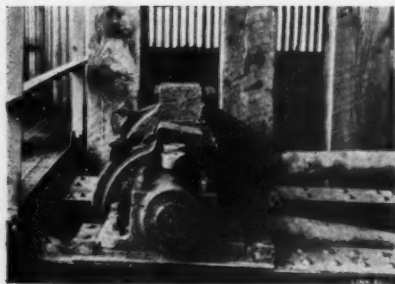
End view of eccentric shaft with cast iron ball faced eccentric and split babbitted cast steel eccentric straps for driving two sets of shaker screens.
